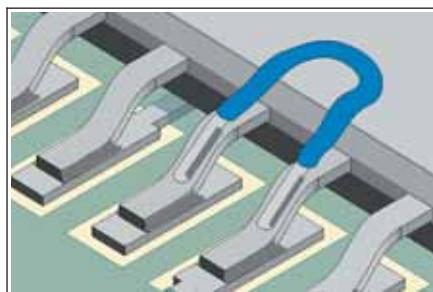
Acceptable Wire soldered parallel to component lead.
